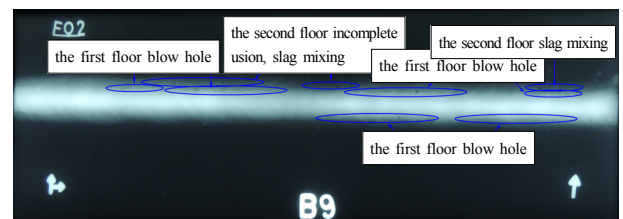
X-ray Radiographic test film of welding specimen to 4pass at CO₂ 20% +Ar 80% in 25 L/min
